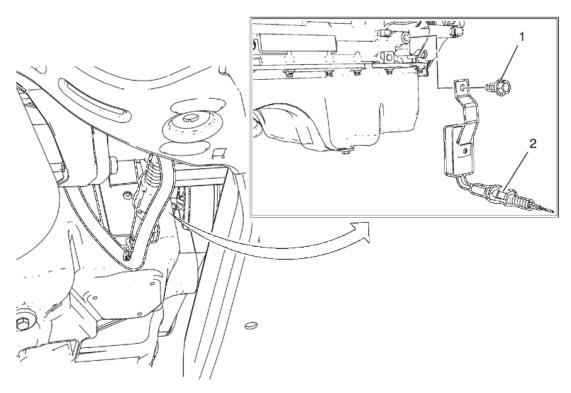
Engine Oil Heater And Bolt Courtesy of GENERAL MOTORS COMPANY
